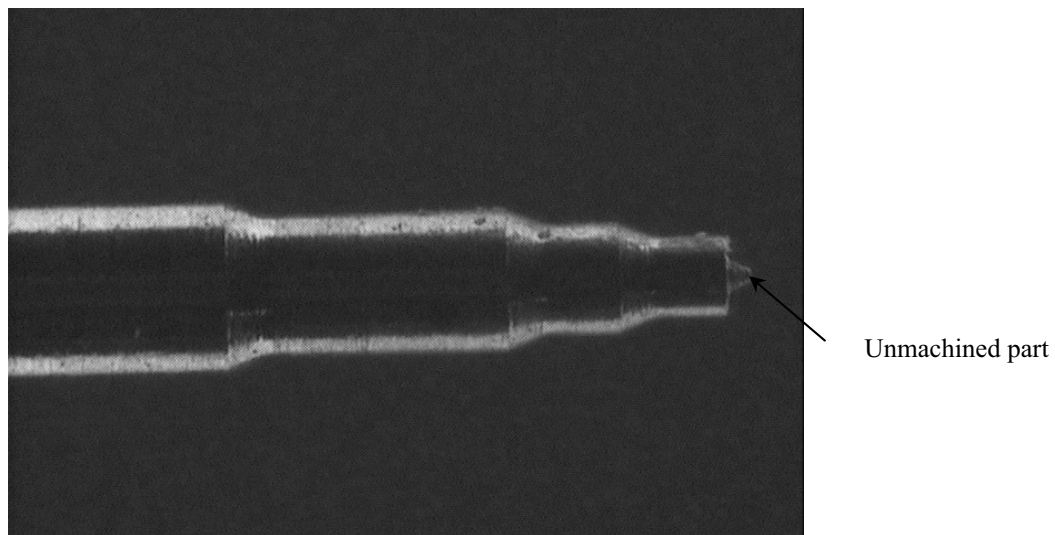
Defects in disk-2 cutting operation (scale of 1:0.000392)
